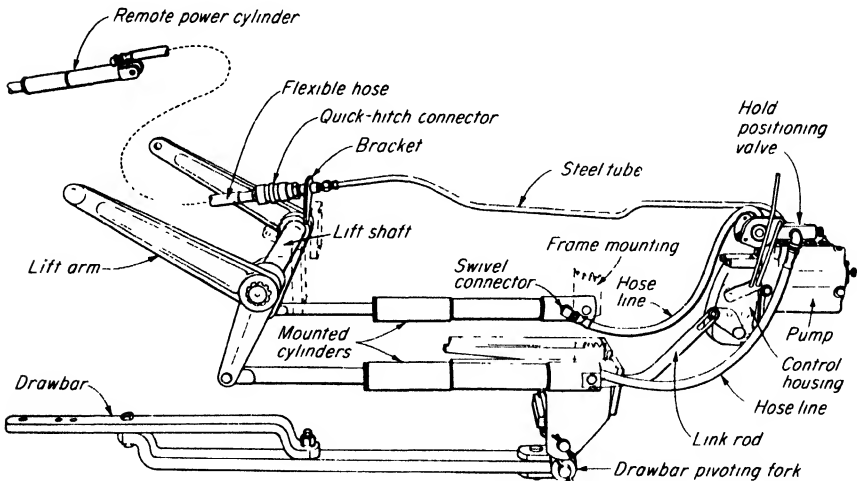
Schematic diagram showing hydraulic oil pump, hose lines, and power cylinders for operating lift shaft and crank arms, mounted as component parts of the tractor, and optional use of a remote-control cylinder. (Allis-Chalmers Mfg. Co.)
